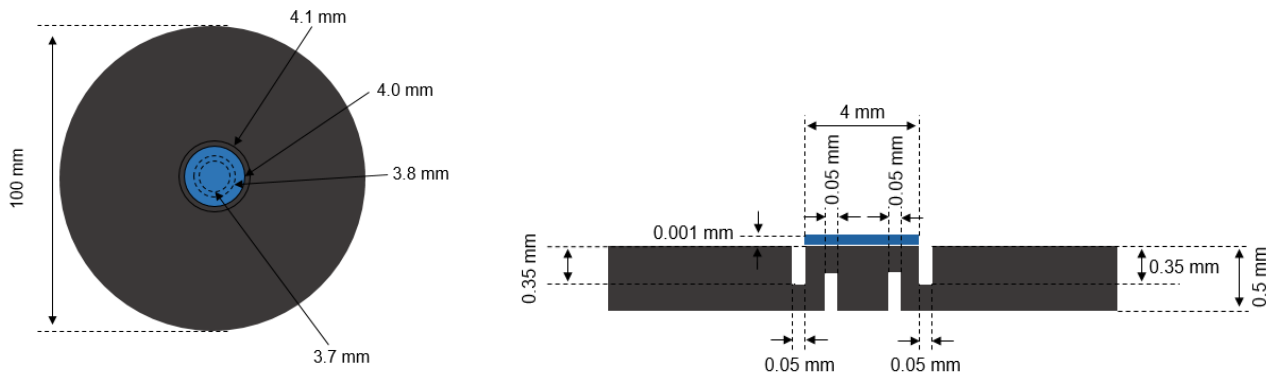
Drawing of the moat concept with dimensions. Not drawn to scale.
